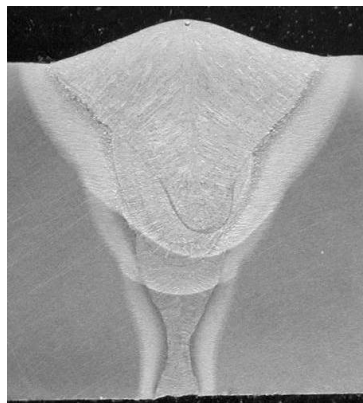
Macro-section of laser – GMA welds on X70 pipes 14.2 mm thick
